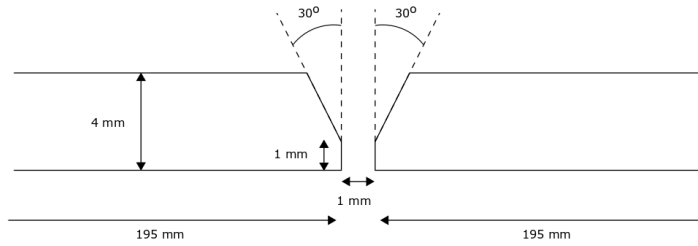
Illustration of the weld groove dimensions. Sheet width 195 mm, weld groove of 30° and a "nose" of 1 mm.
